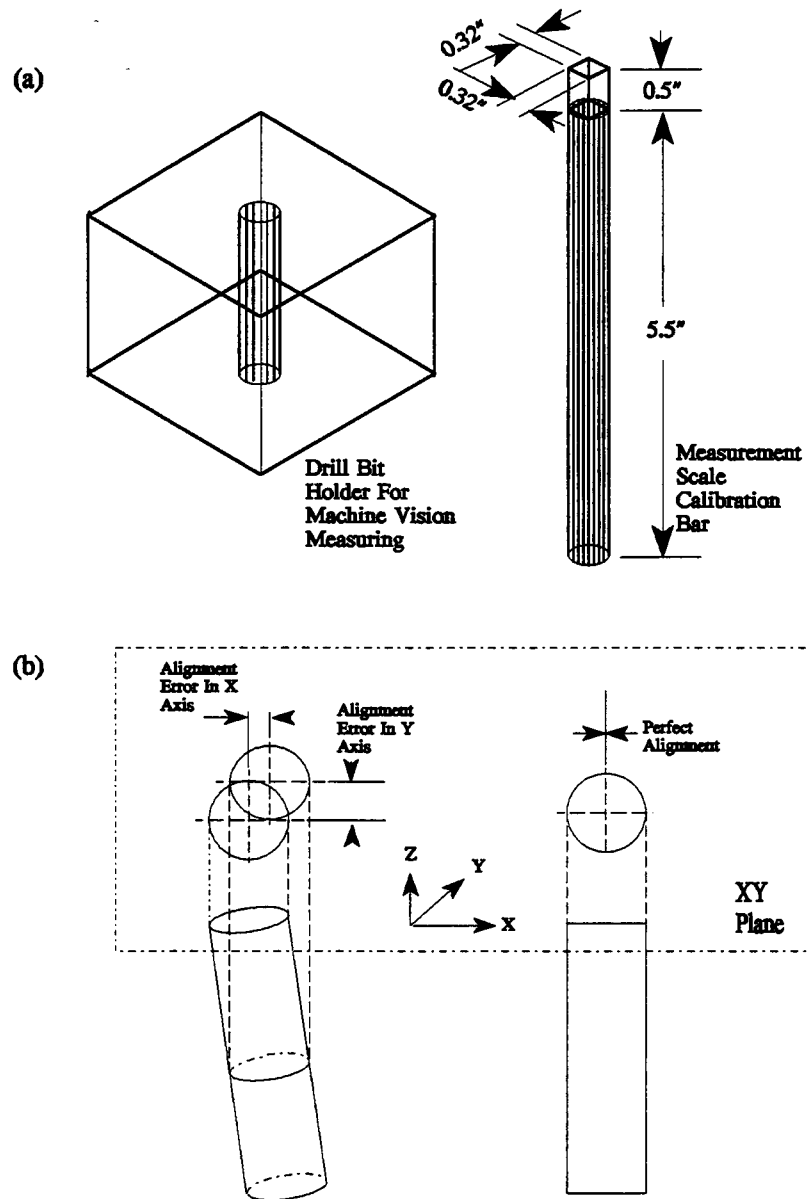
Calibration method used for machine vision measurement of drill wear, including (a) the designed drill-bit holder and bar used to calibrate measuring scale and (b) the alignment algorithm.
